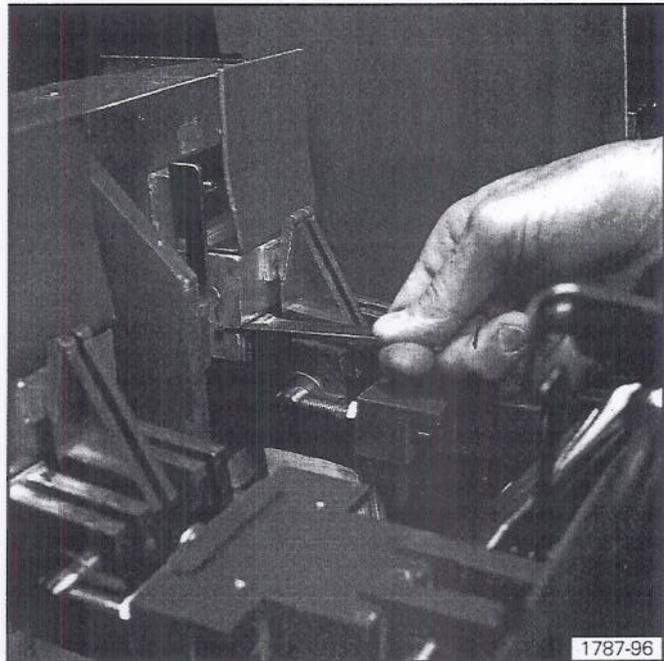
Check of Main Contact Make (Compression) Using GO/NO-GO Gauge
